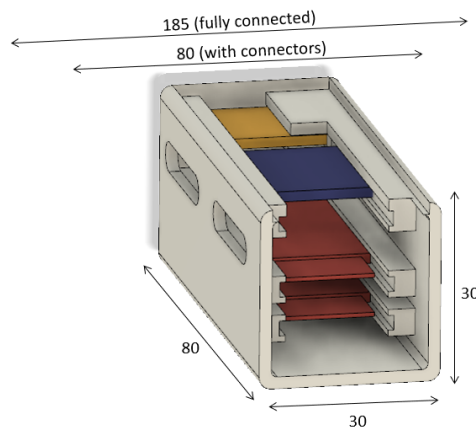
CAD of the TVECU box with top removed and PCBs in place.
